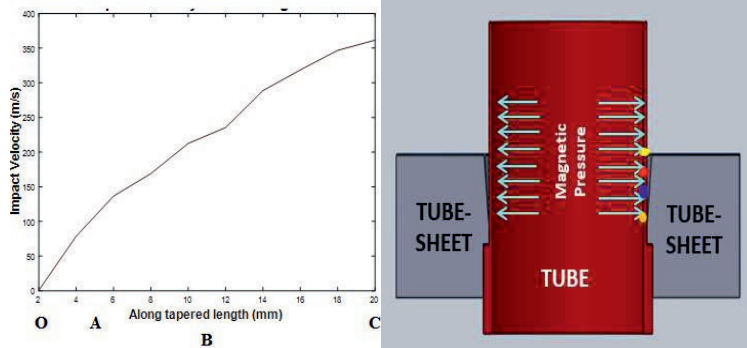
(a). Schematic showing cut section of Al tube to tube-sheet under magnetic pressure (b). Different sections of tube getting driven with different velocity, O, A, B, C.
